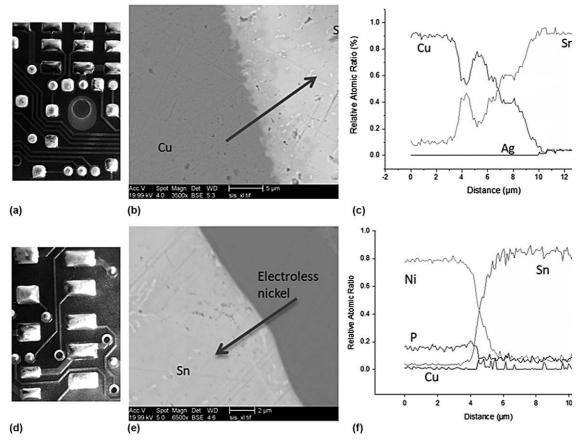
Data from *Tri-Moore* rotary wetting trials of Cu (a), and Au (ENIG) (d), finished PCB coupons, each fluxed with the DES *Reline*. SEM images of microsections (b) and (e) of the soldered Cu and Au (ENIG) coated PCB coupons respectively. EDX elemental line analysis, (c) and (f) of the solder joins shown in (b) and (e) respectively. The EDX spectra were acquired along the arrow indicated in the SEM images (b) and (e).
